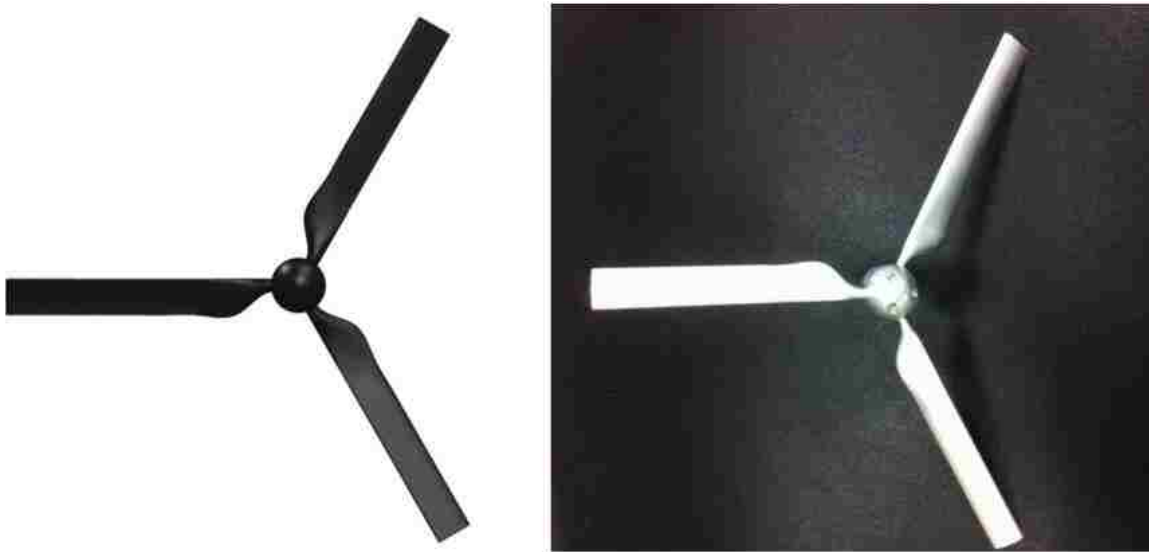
CAD Model (left) and Physical Turbine Rotor (right) [17]
